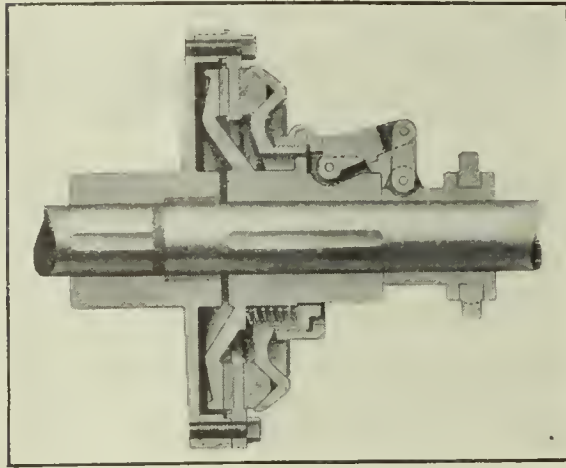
SECTIONAL VIEW OF THE LEMLEY CLUTCH
